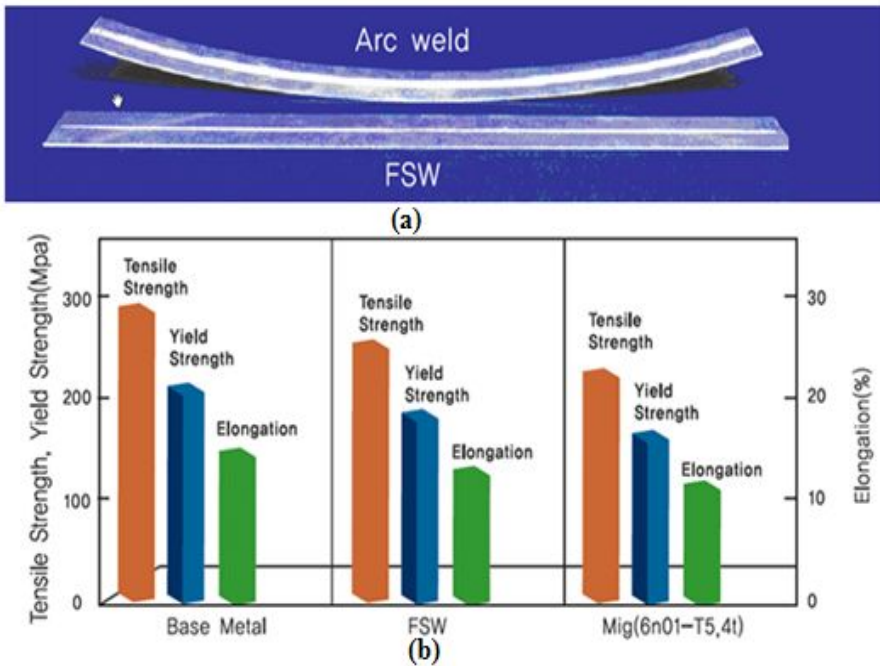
Comparison of FSW and conventional welding process; welding appearance after weld(a) and mechanical properties(b)
